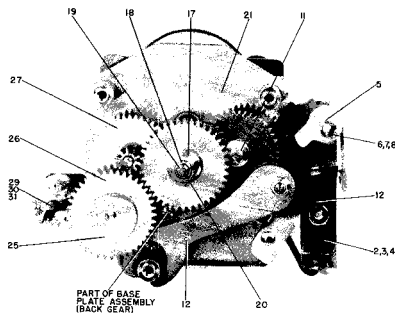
Front View of C51 Clocks—Front Plate Removed
